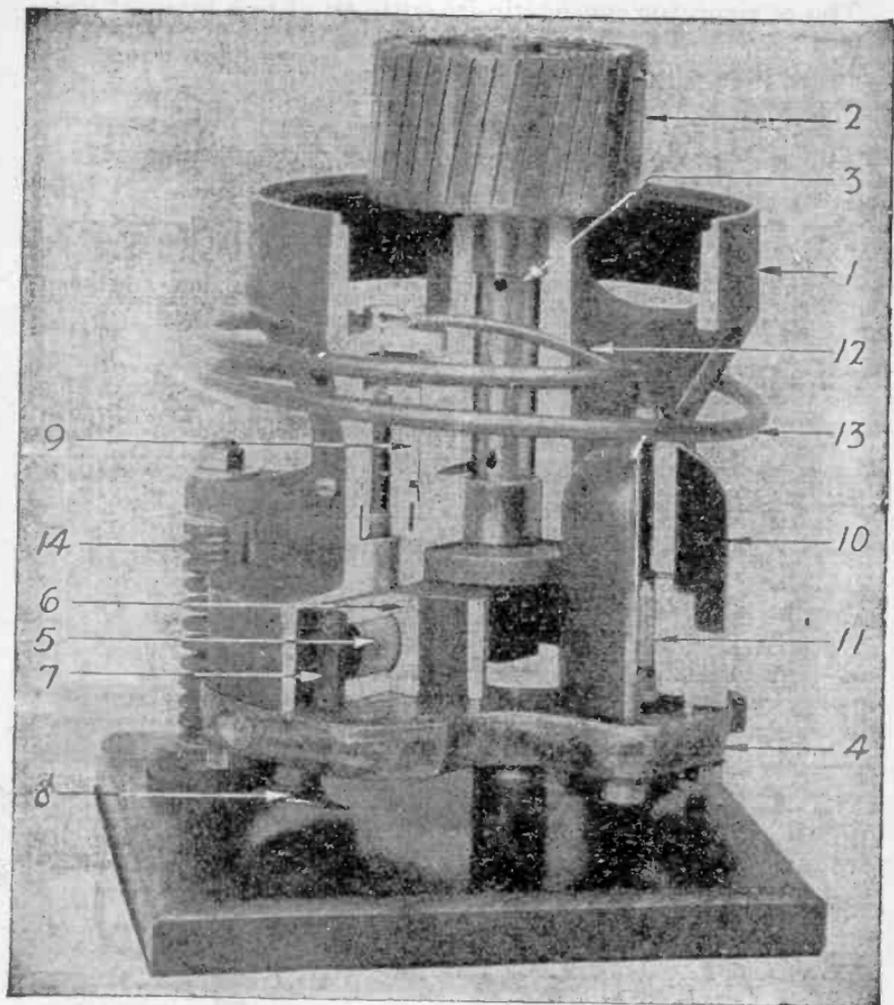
,685.—Cutaway section of General Electric refrigerator machine. The parts are: 1, main frame; 2, rotor; 3, main shaft; 4, bearing plate; 5, piston; 6, cylinder; 7, muffle box; 8, oil screen; 9, unloader; 10, surge chamber; 11, check valve plunger; 12, unloader tube; 13, suction tube; 14, supporting springs.
